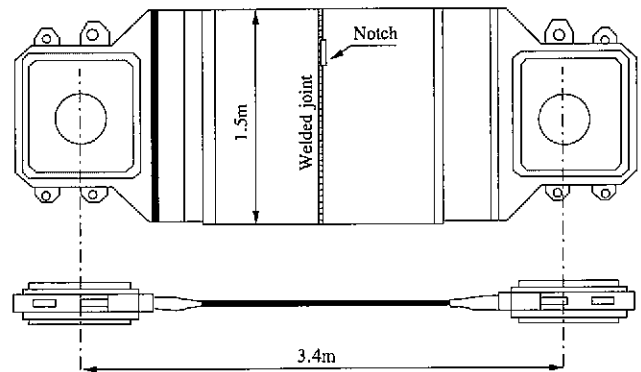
Brittle crack propagation test method for welded joints
